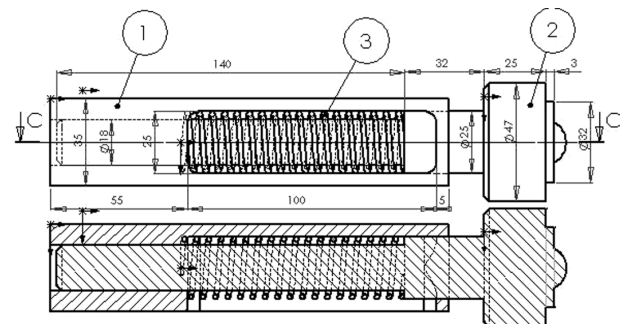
Detailed drawing of the ball burnishing tool: (1) casing; (2) adapter cover; (3) spring
